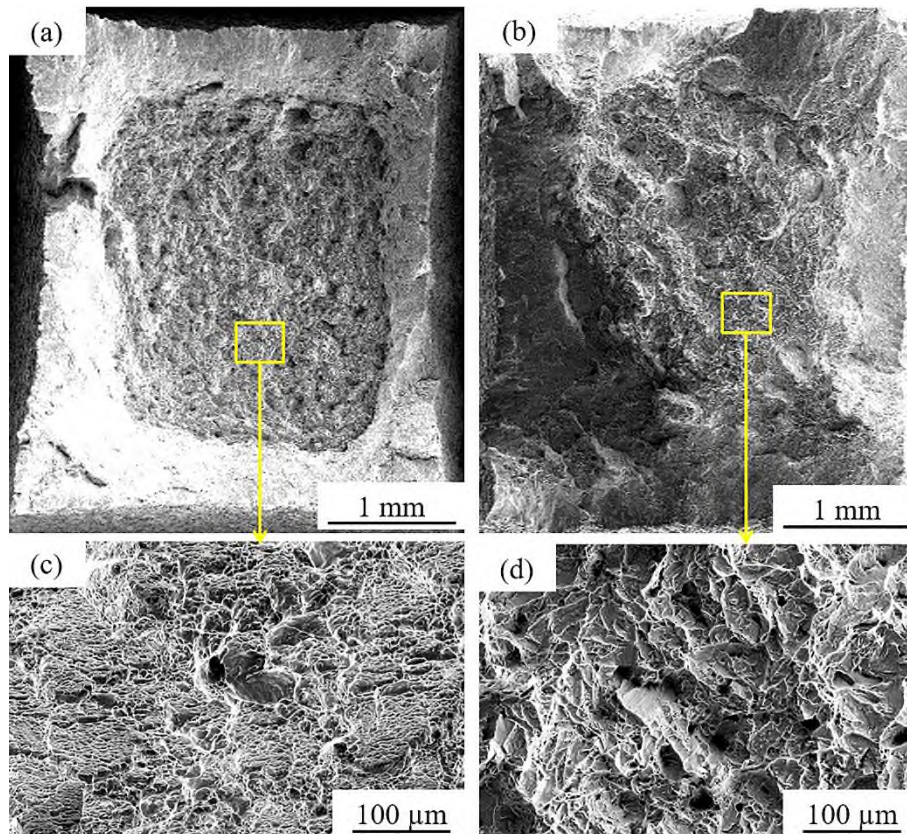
Tensile fracture surfaces, (a) reference, (b) porosity, (c) and (d) enlarged views of (a) and (b) showing the dimple size differences.
